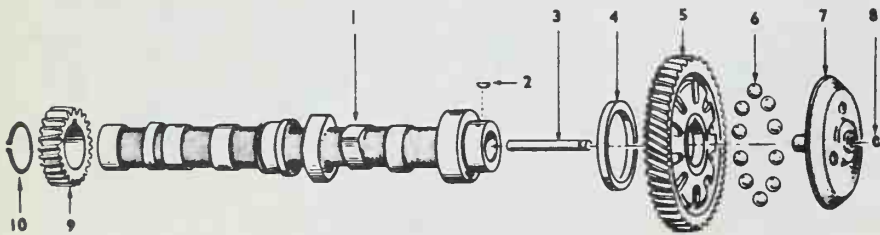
Exploded view of camshaft and governor sensor assemblies. Diesel Model DJB is shown.
